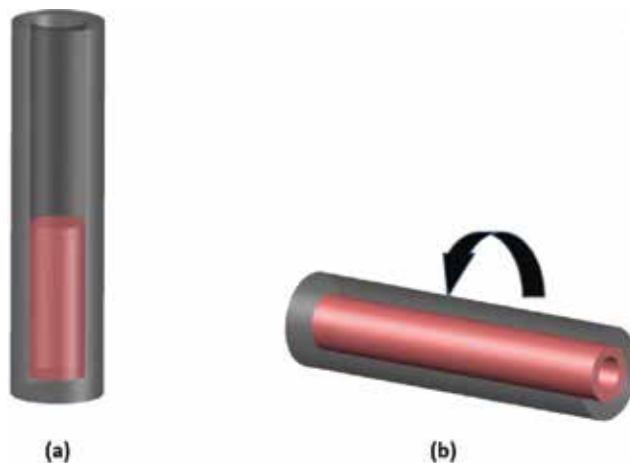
Schematic of the rotational casting procedure for manufacturing glass tubes: (a) the molten glass is cast into a mold held in vertical position; (b) the mold is tilted in the horizontal direction and then rotated at high speed. A glass tube forms along the mold internal walls.
